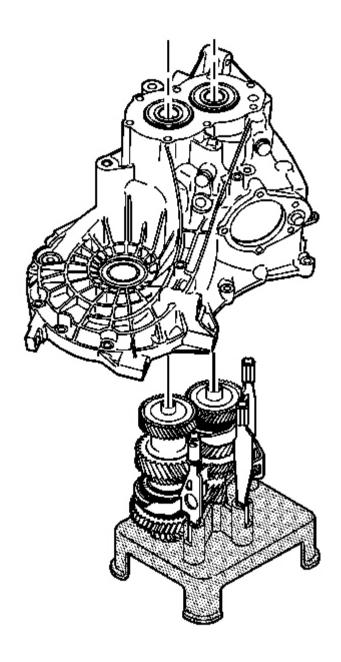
Installing Housing & Shafts Courtesy of GENERAL MOTORS CORP.
